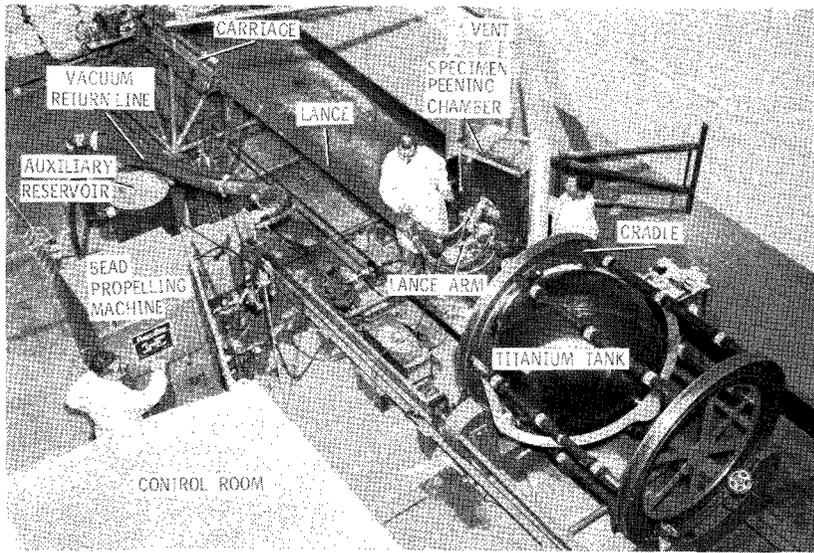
Glass-bead peening equipment and 51-inch (1.3 m) diameter tank.
